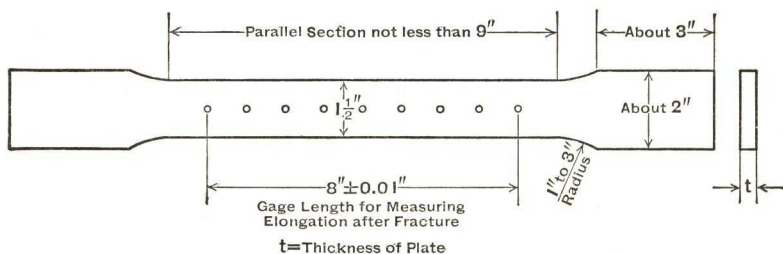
Standard 8-in. Gage Length Test Specimen.
